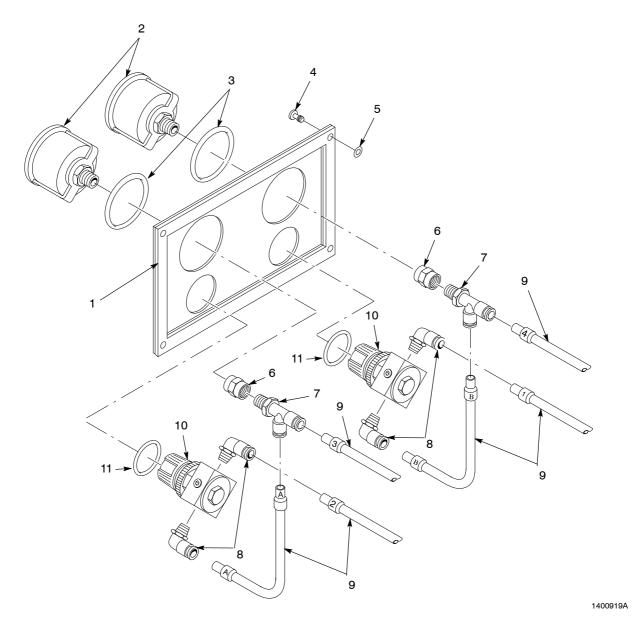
Rack Unit Pneumatic Control Module Assembly
